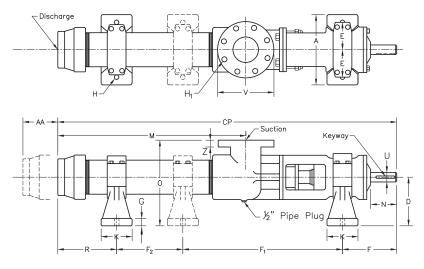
Single-screw rotary pump. Courtesy of Moyno Industrial Pumps, a Division of Robbins and Myers.
